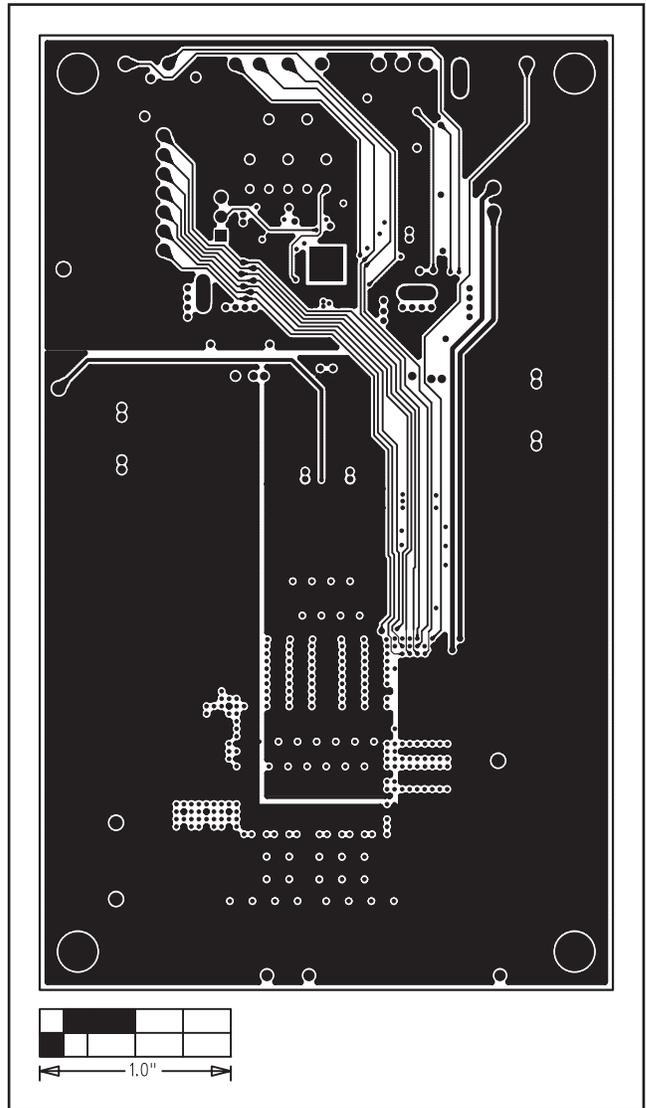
MAX17582 EV Kit PCB Layout—Internal Layer 3 (Signal Layer)
